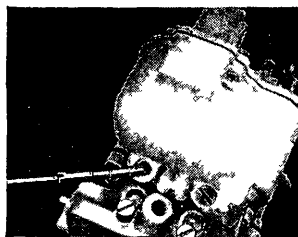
Install nozzles, nozzle retainer plugs and nozzle passage plugs. Install with flat side of nozzle up. Use new gaskets
